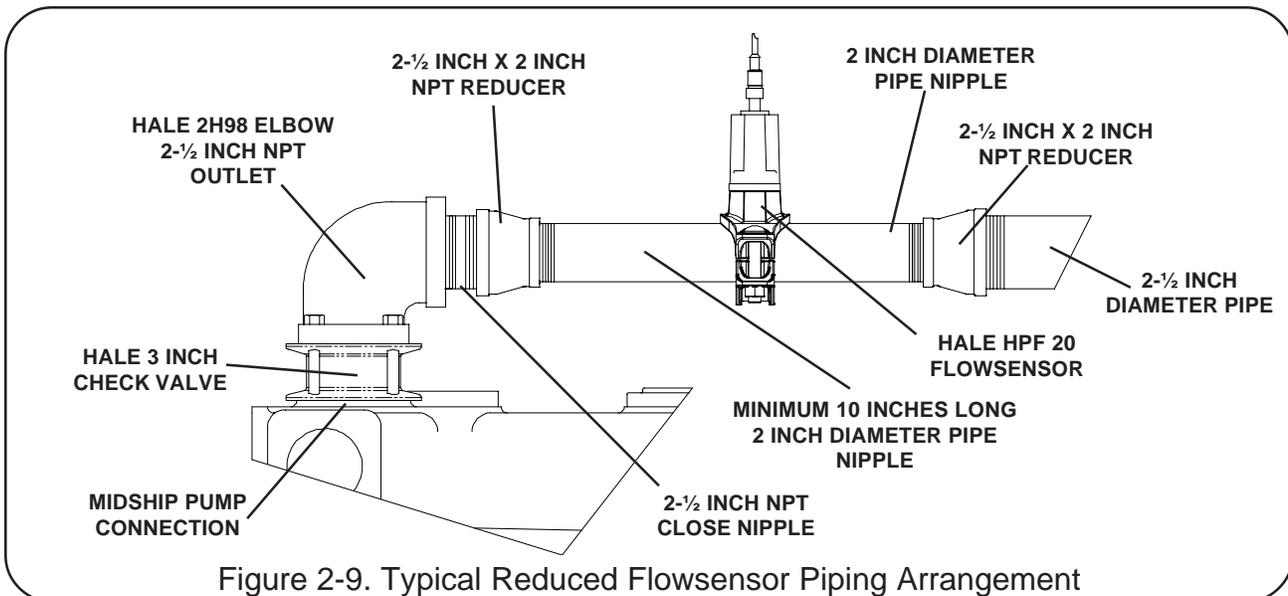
Typical Reduced Flowsensor Piping Arrangement
